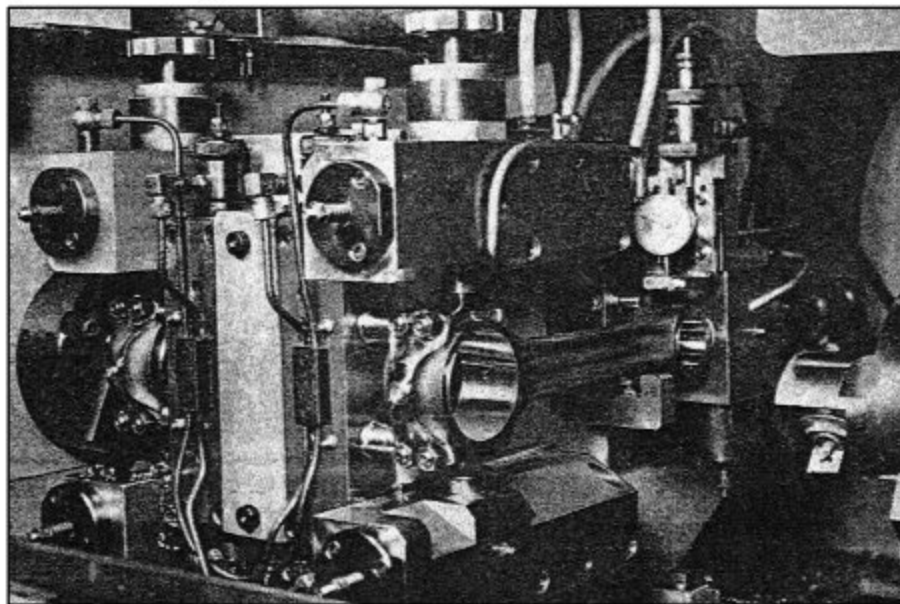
Station 2 of the fixture for finish boring of the small end to Newall A limits and semi finish boring of the big end. The boring bars are fitted with Microbore tooling. The knob at the top of the fixture and gauge at the back provide a fine adjustment to ensure the two holes are in line with the boring tools.
